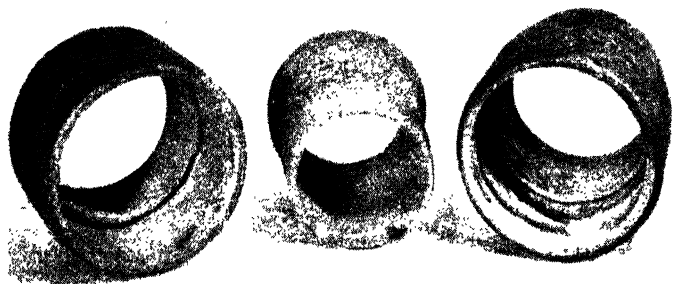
EXAMPLES OF WEARING AWAY OF PIPES DUE TO THE USE OF SOCKETS INSTEAD OF EXPANDED-ON FLANGES
